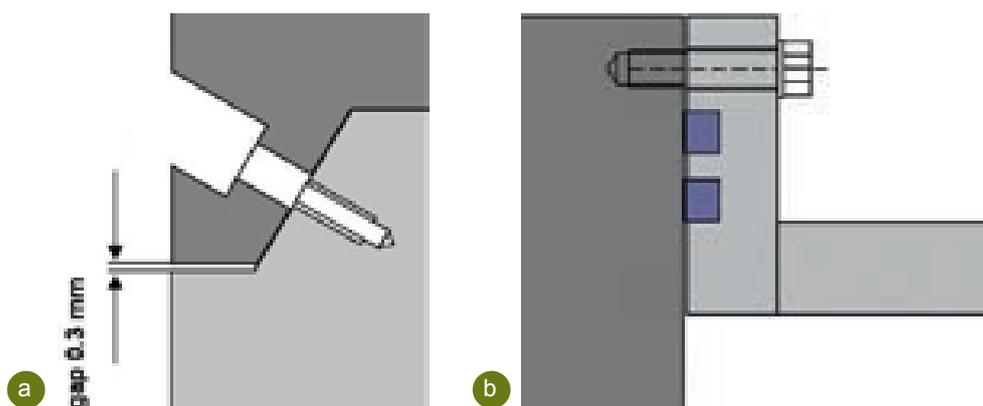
Alternative design for: (a) the assembly of the segments of the flange using bolts and a resin applied in a 0.3 mm gap; (b) the assembly of the cylinder (light grey) to the downstream flange (dark grey) is done using two gaskets (blue) and bolts.
